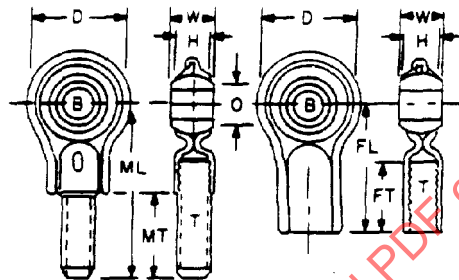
TYPE D RACELESS STAMPED HOUSING
